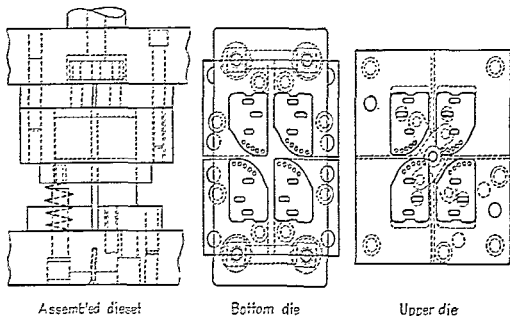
Die for producing slide, which is assembled to spice-box cover.⁵
